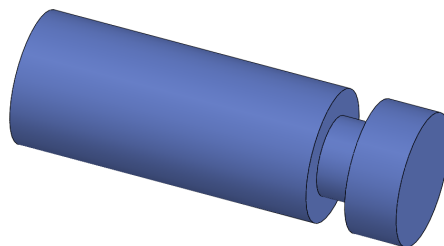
Schematic view of actuator pin with notch for O-rings.
